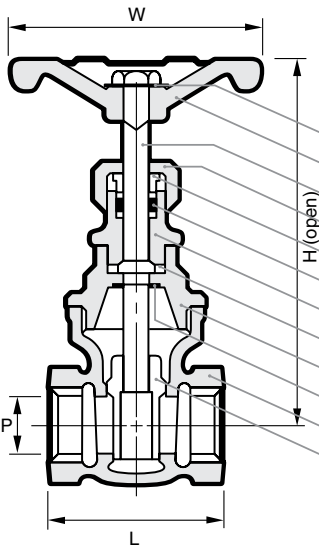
B-200 N.P.T. or FIG. 90BSW Socket Weld
